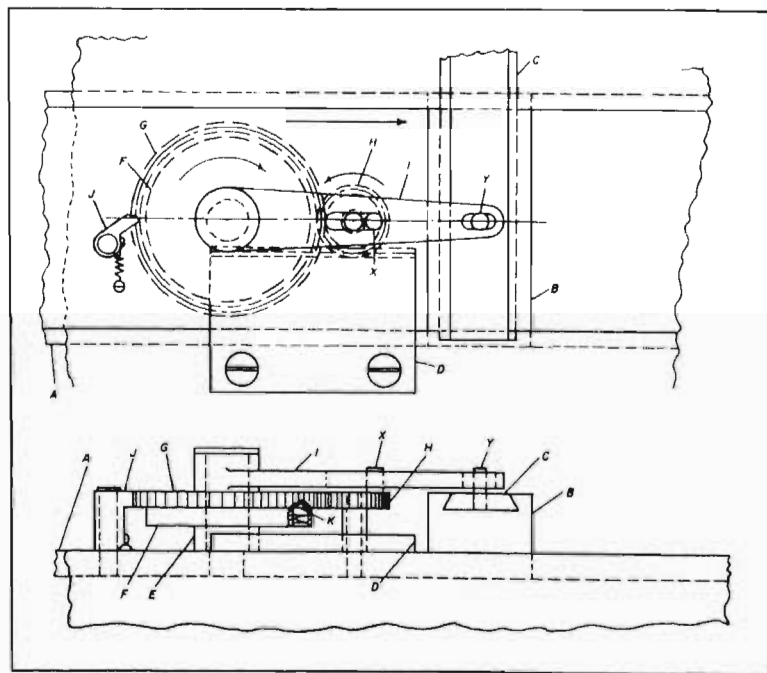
Mechanism for wire fabricating machine which moves two slides lengthwise and one of them crosswise.
